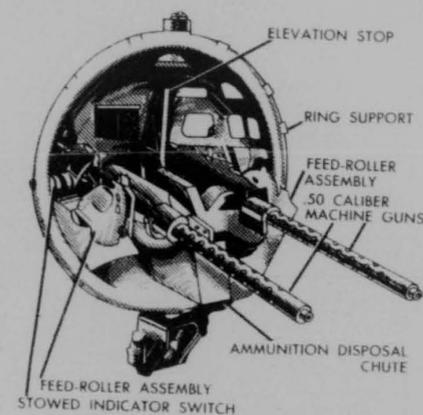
Tail Turret with Cover Removed, Rear View.
